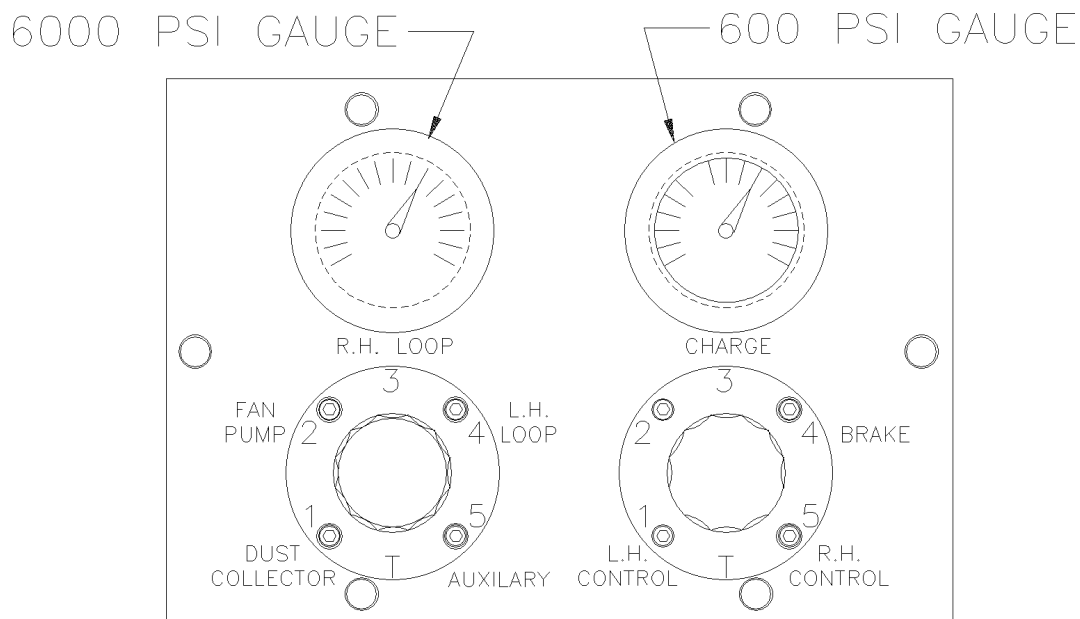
Hydraulic Pressure Test Station Detail
